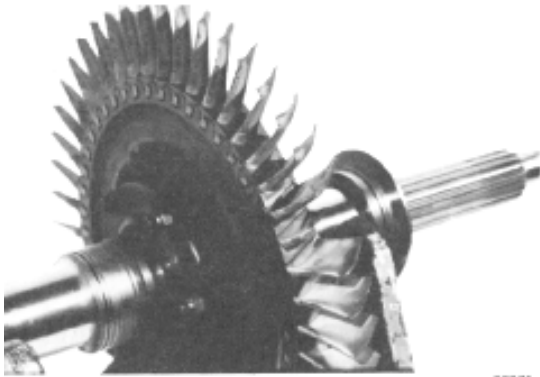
Stretched Blades That Have Rubbed The Shroud
